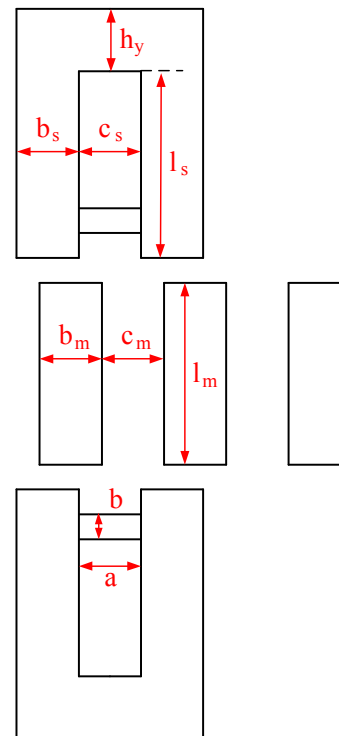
Sketch of the linear hybrid reluctance actuator showing its main dimensions.
